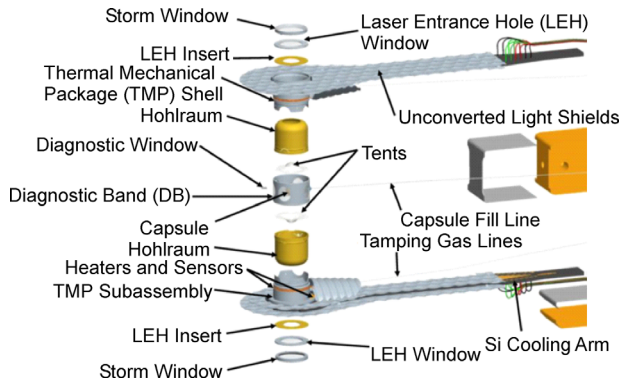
Exploded view diagram of an indirect-drive target used for layered implosions.
